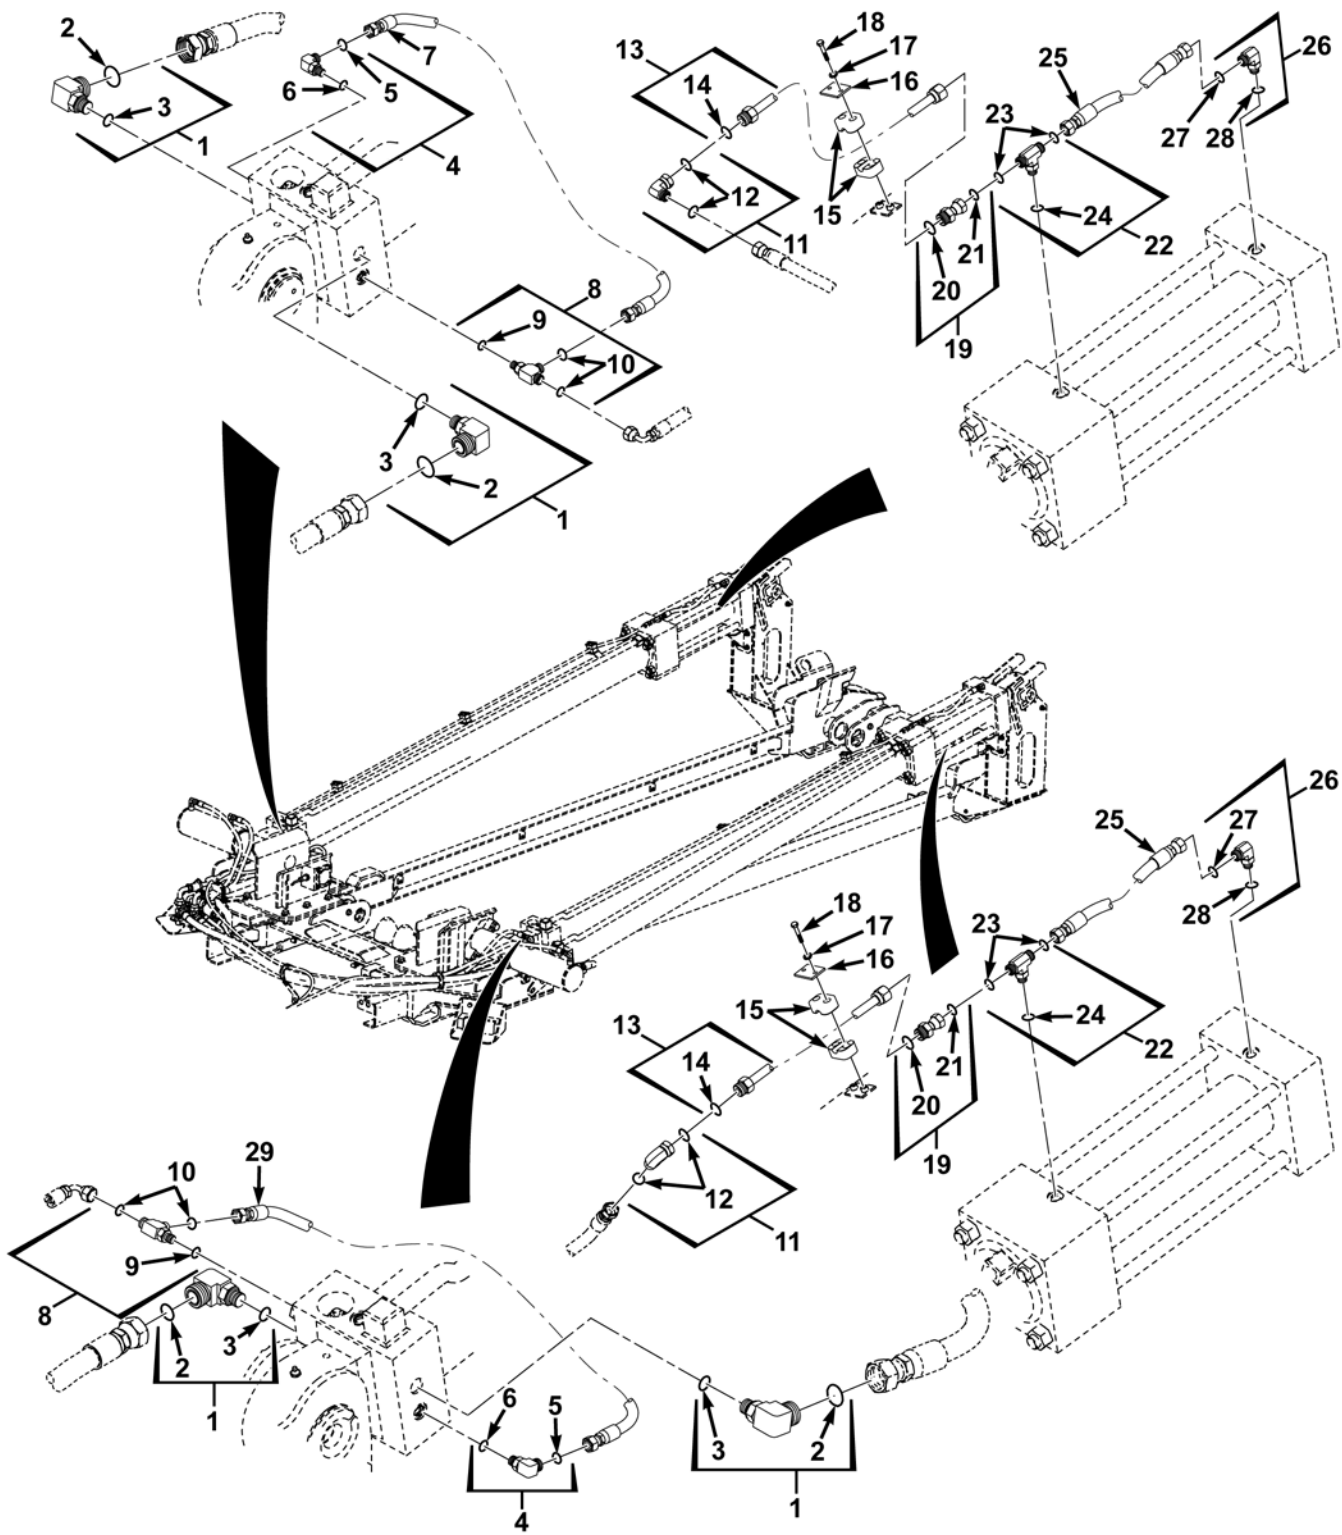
MRP HYDRAULIC LINES AND FITTINGS (SHEET 1 OF 2)
